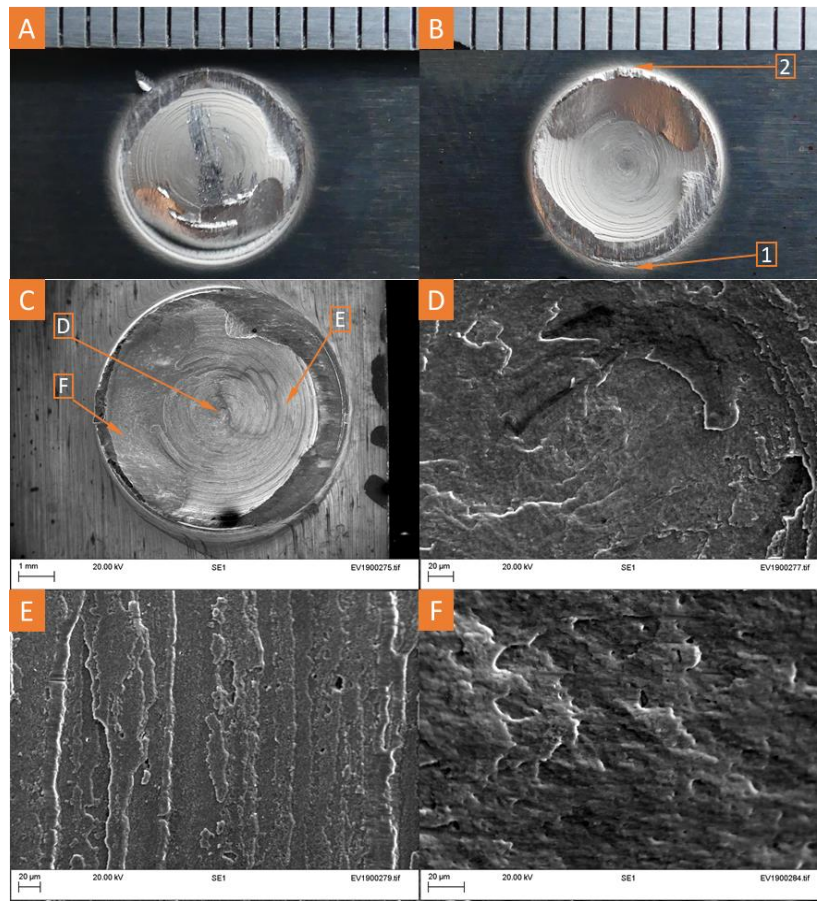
Fracture surfaces of RFSSW AA7075-T6 condition W21 (RS = 1000rev/min; PD = 2.4mm):
